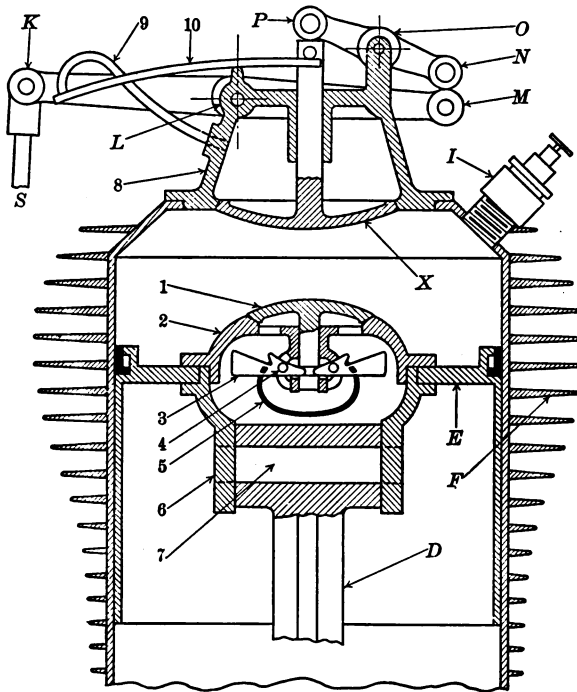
GNOME CYLINDER AND PISTON SECTION SHOWING AUTOMATIC INLET VALVE
